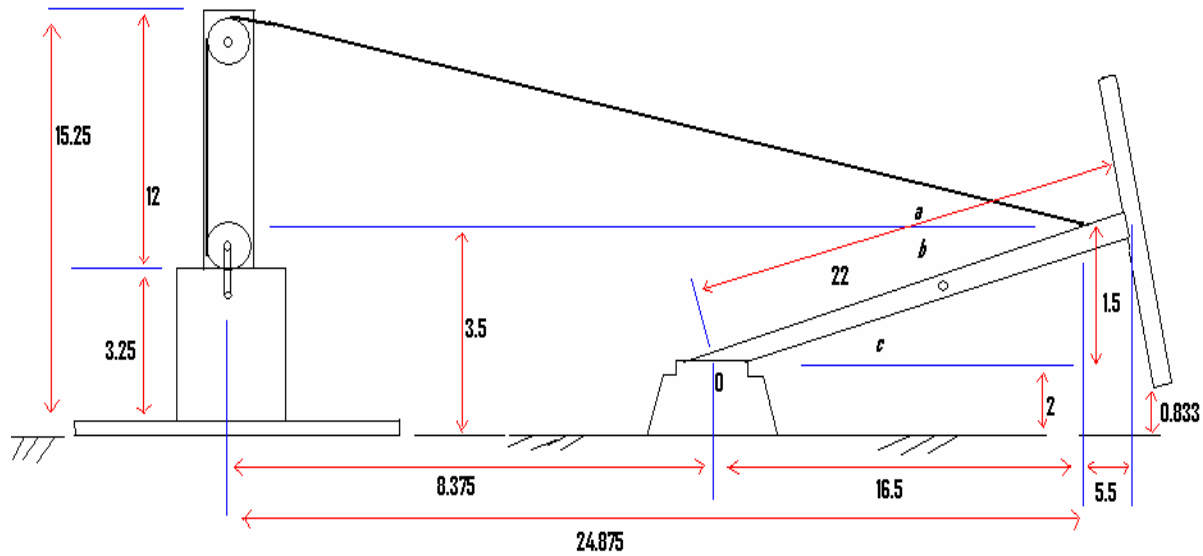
Drawing of the tracking system showing dimensions in feet of the winch assembly and support mechanism.
